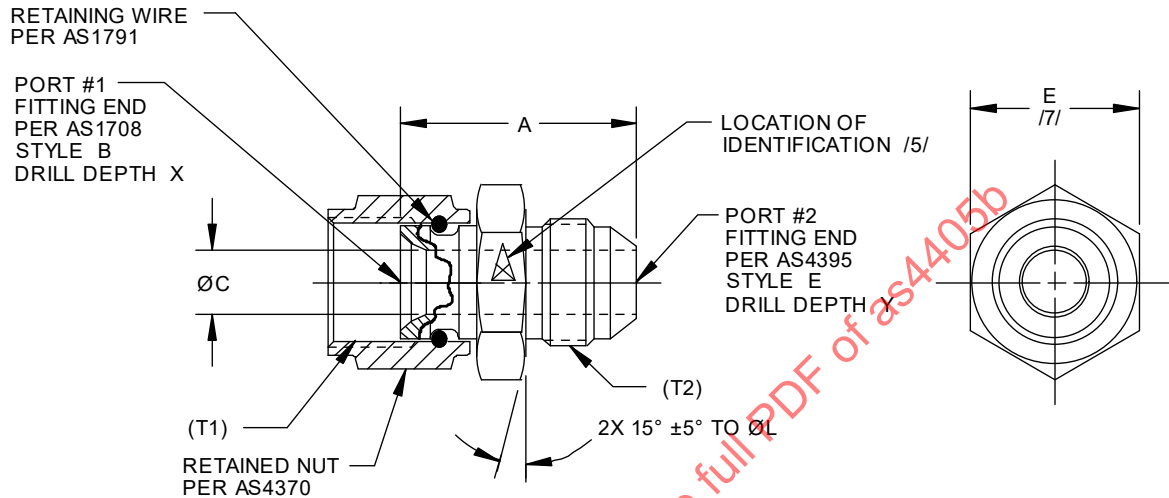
FITTING ASSEMBLY, ADAPTER
